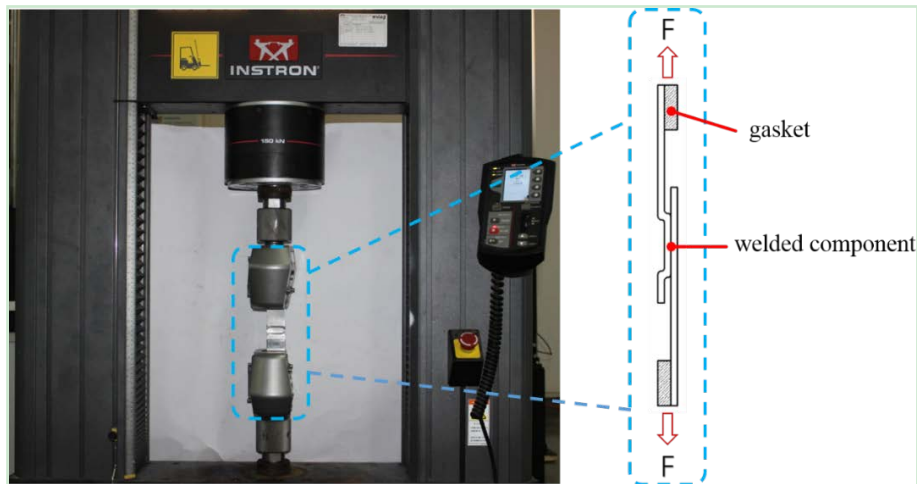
Shear test of aluminum-steel magnetic pulse welded joint
